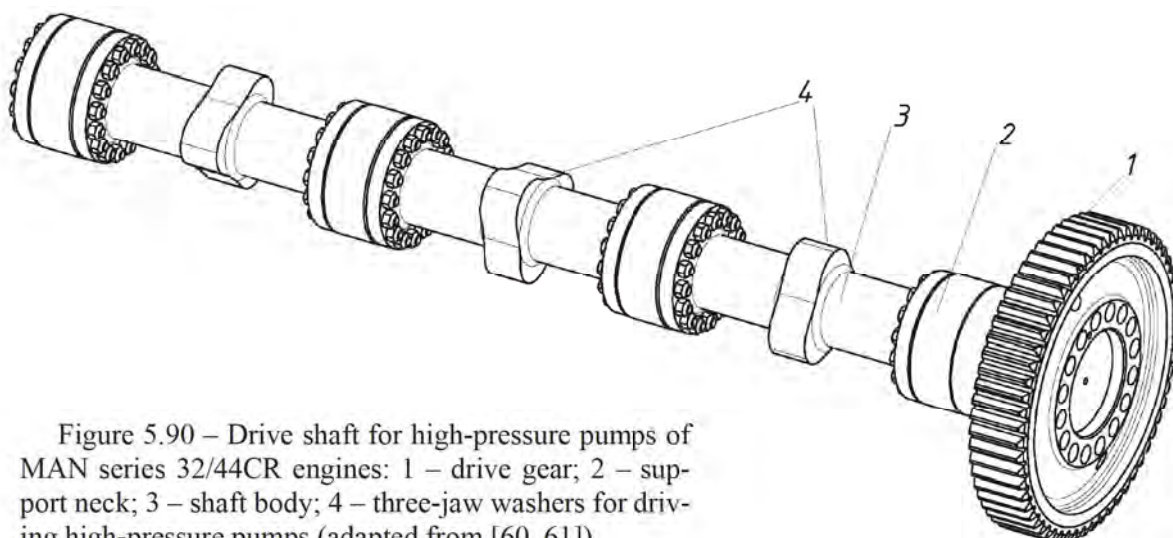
Drive shaft for high-pressure pumps of MAN series 32/44CR engines: 1 – drive gear; 2 – support neck; 3 – shaft body; 4 – three-jaw washers for driving high-pressure pumps (adapted from [60, 61])
